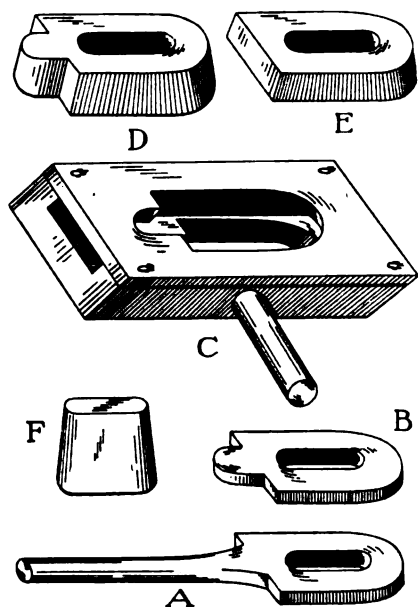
PUNCHING PLATES USED IN MAKING CAR DOOR STOPS. A, B.—FINISHING UP THE PIECE.
